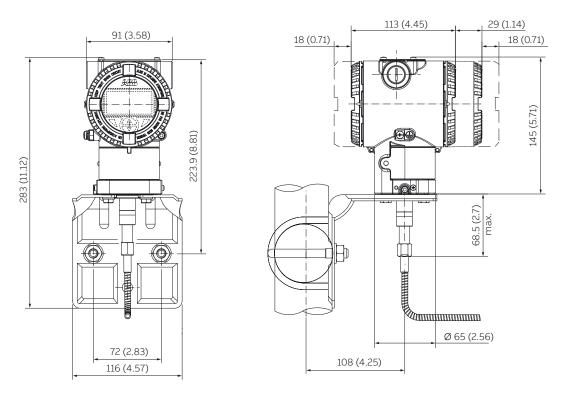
266HRH, 266NRH with barrel housing and remote seal(s) on bracket for vertical or horizontal 60 mm. (2 in.) pipe sensors Z
